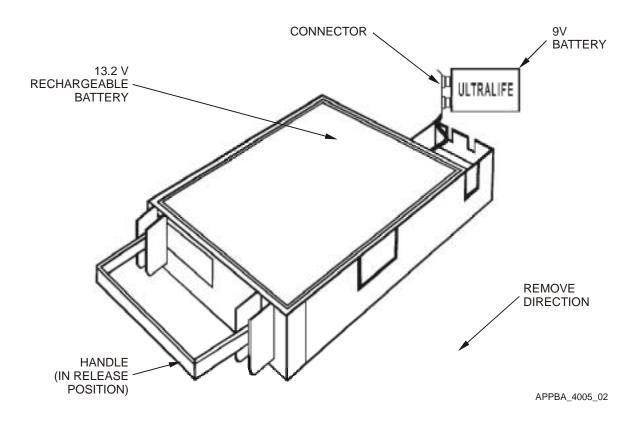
Remove and Replace Battery Housing Assembly for PU NSN 7021-01-474-3793/NSN 7021-01-487-0578
